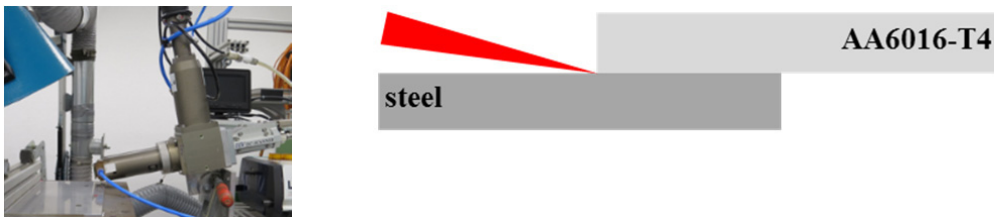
Experimental setup for the laser beam welding of different dissimilar fillet welds of aluminum alloys and steel (aluminum-sided irradiation).
